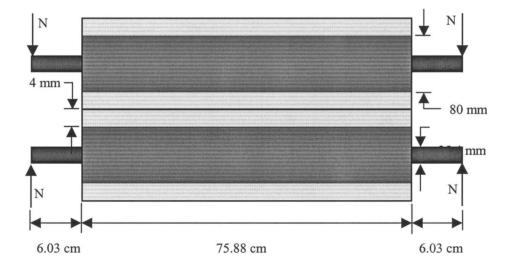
Dimensions for Rubber Covered Roller Pair Tested
